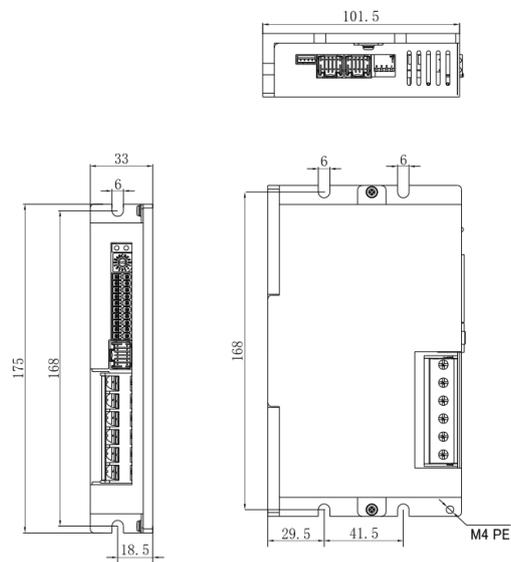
(B) installation method of drive ELD2-CAN7015B/ELD2-CAN7020B/ELD2-CAN7030B
